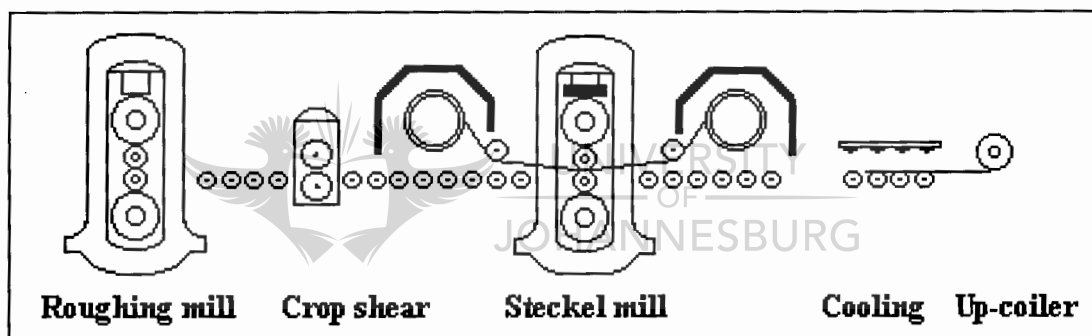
Steckel mill processing illustration [adapted from fig. 1 Lopez *et al.* [21]].
